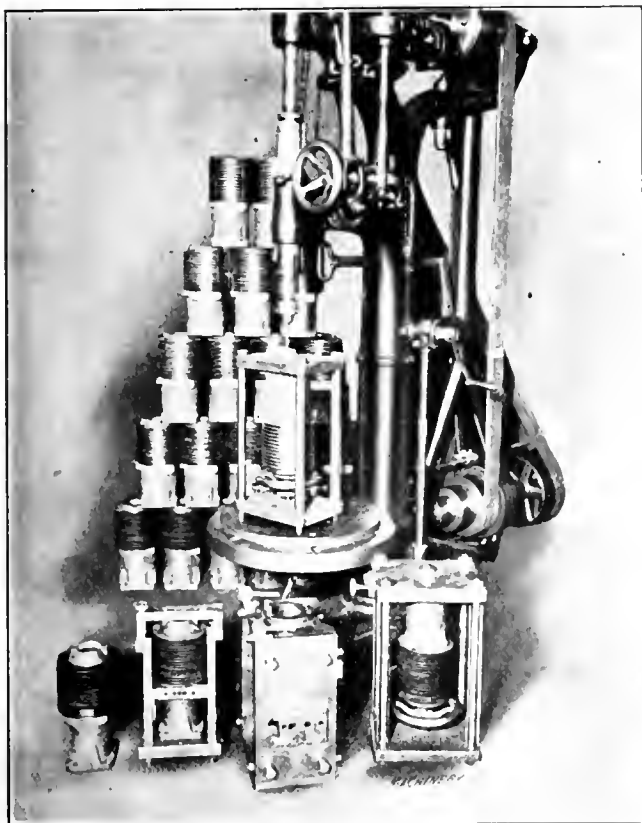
Drilling the Cylinders, and Jigs for this Operation.
